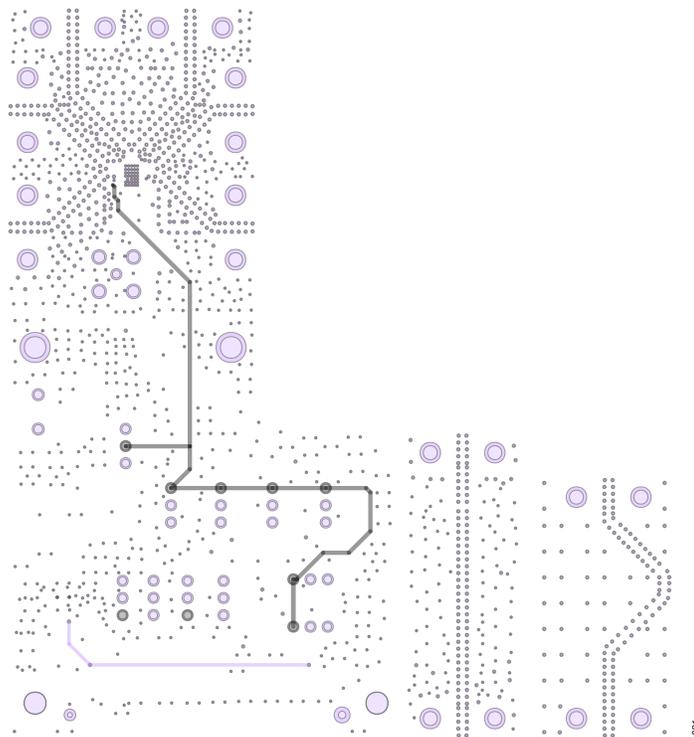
EVAL- ADGM1121SDZ Component Side Ground Plane PCB Drawing (Layer 3)
